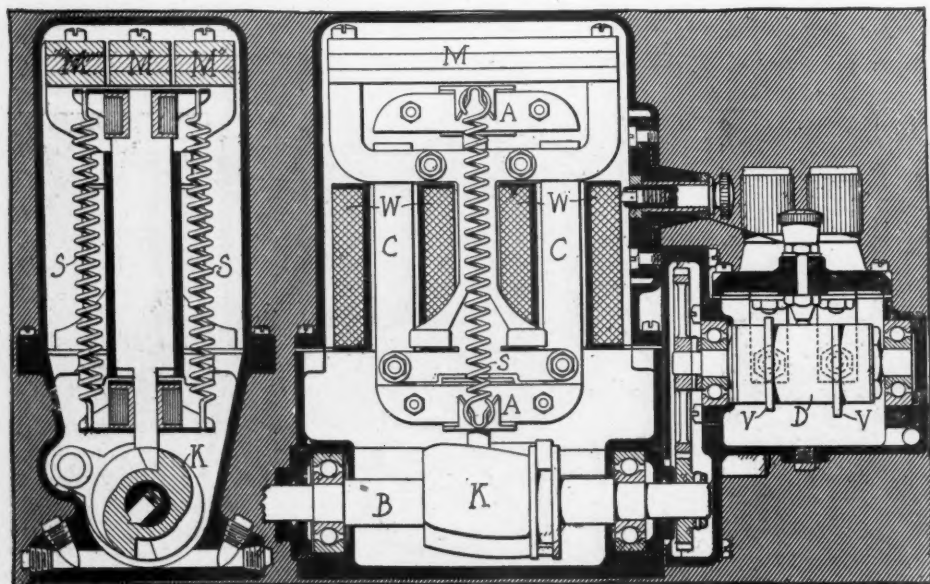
SECTION 1910 WITHERBEE IGNITER FOR MOTOR CARS
